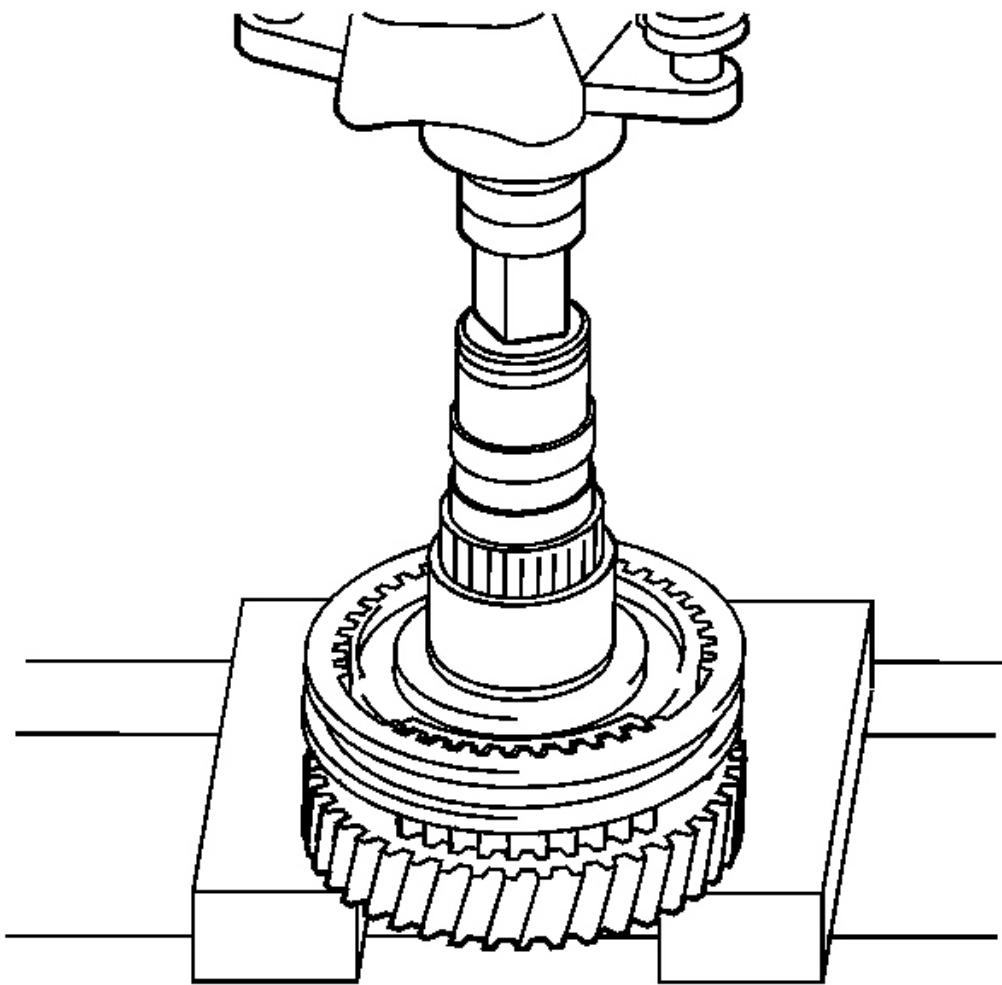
Removing 2nd Gear & 1-2 Synchronizer Assembly
